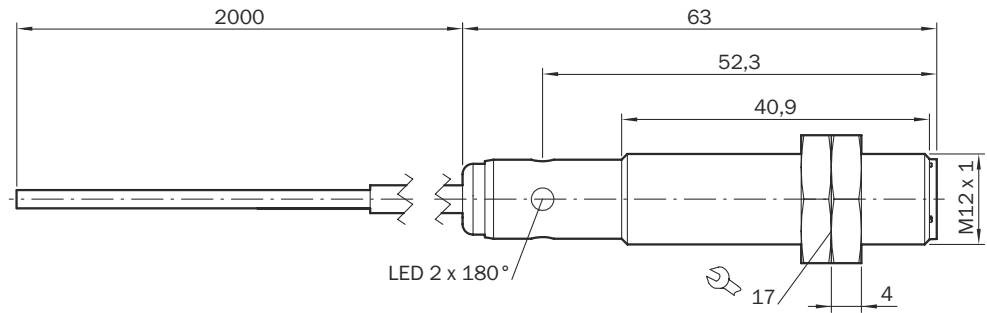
IME2S12-\*\*B\*\*W2 dimensional drawing
